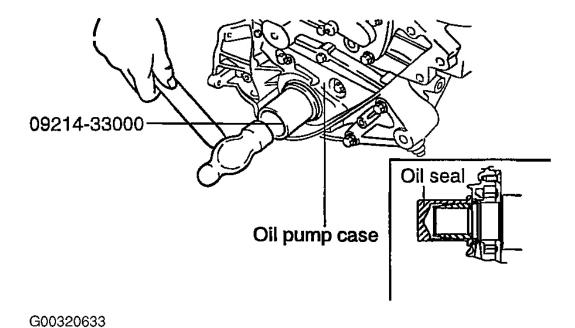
Installing Oil Pump Seal Courtesy of KIA MOTORS AMERICA, INC.
